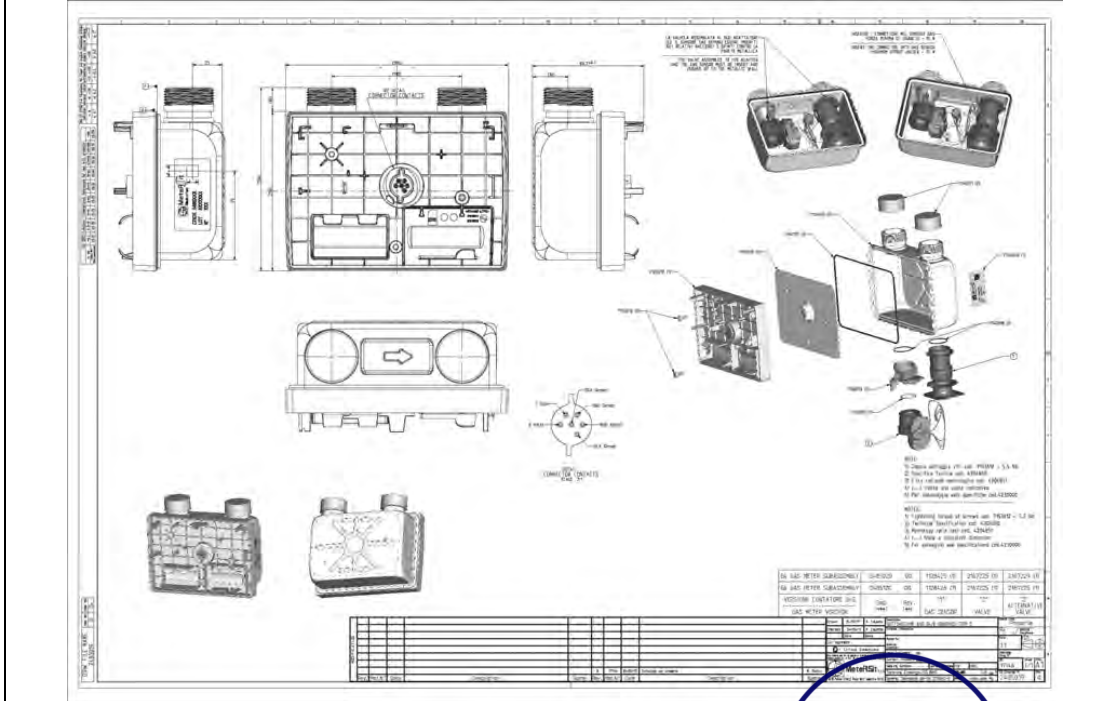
VIEW OF ASSEMBLY AND SUB-ASSEMBLY – GPRS & MBUS
